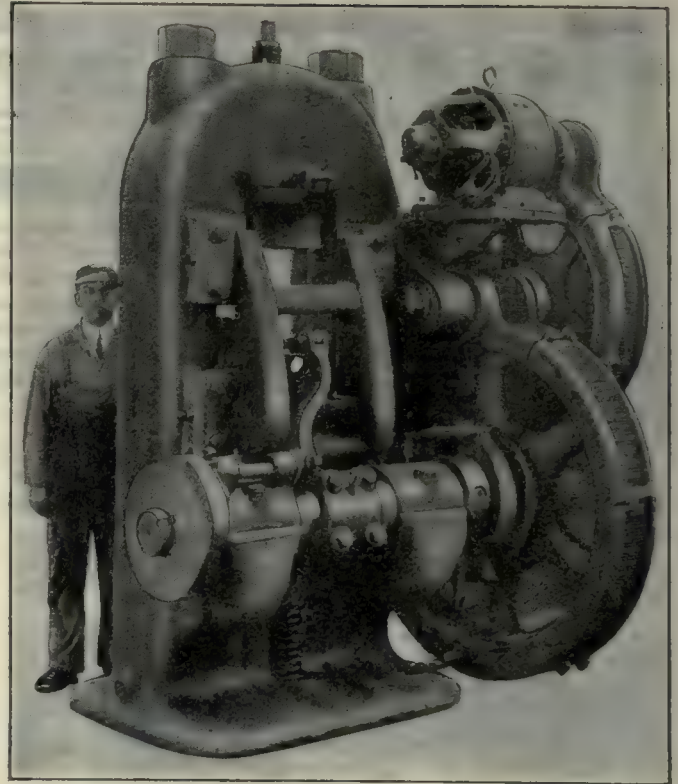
FERRACUTE EMBOSSING PRESS, REAR VIEW
